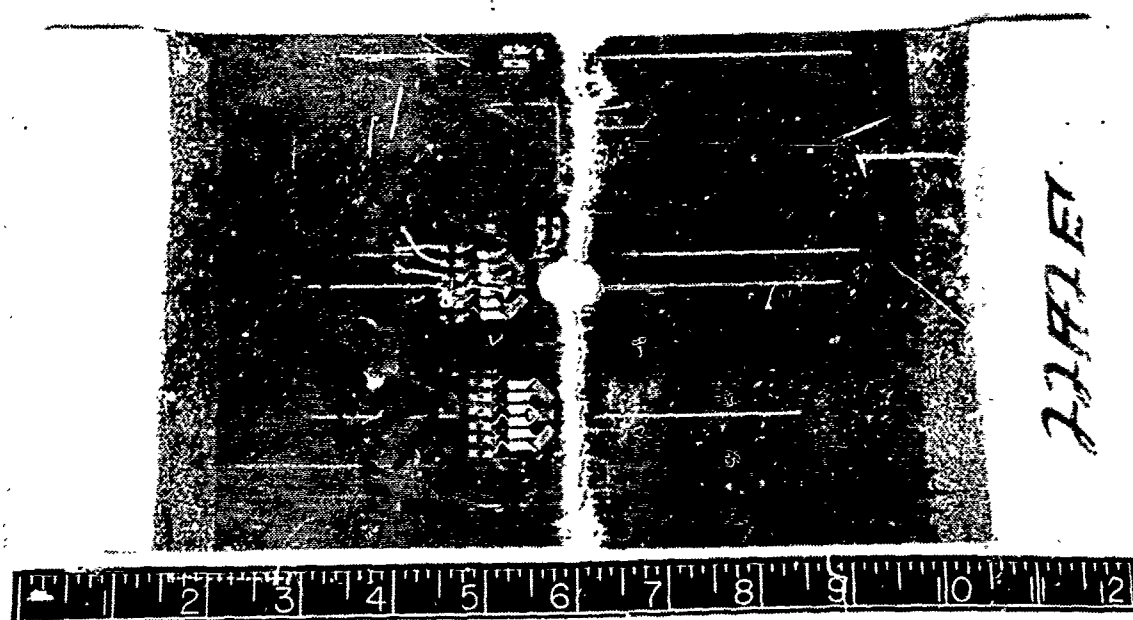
Failure Under Uniaxial Tension Load, Specimen 22A2E1
